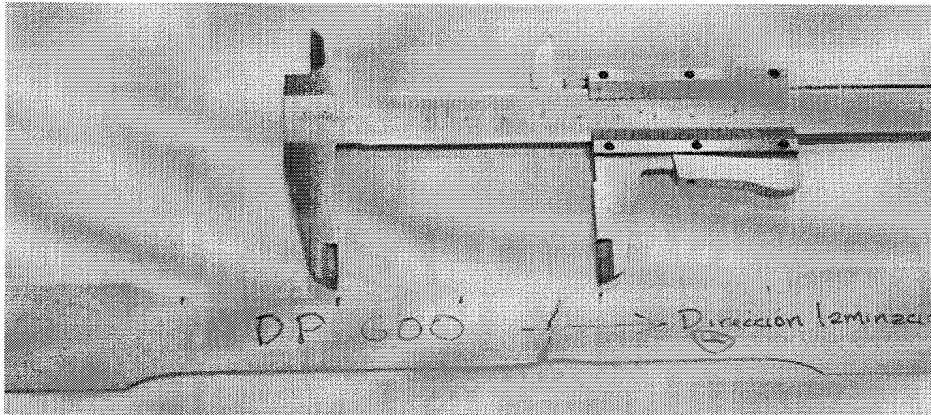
Specimen after being tension tested showing fracture and the rolling direction (arrow)
